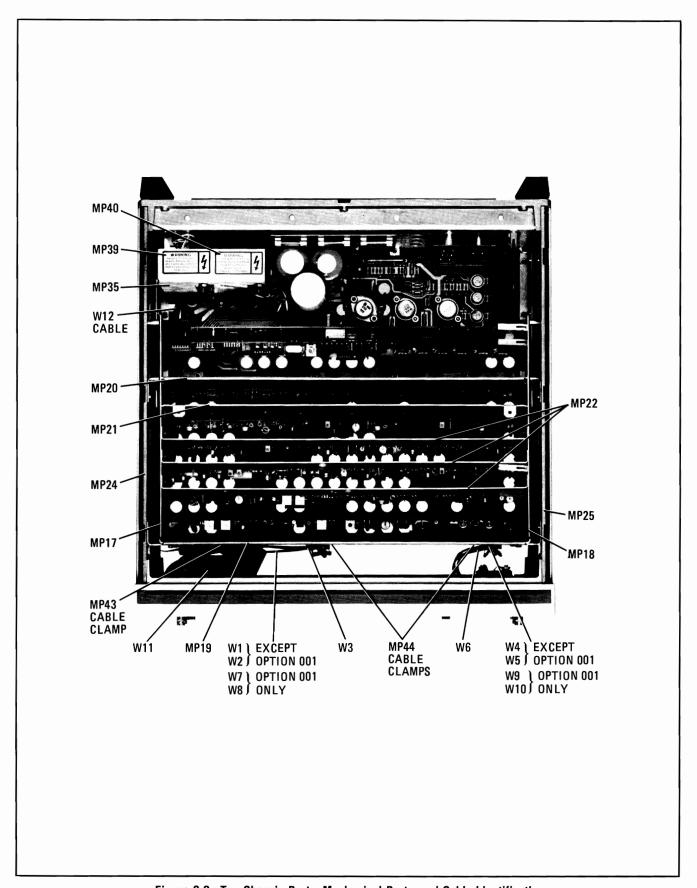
Top Chassis Parts, Mechanical Parts, and Cable Identification
